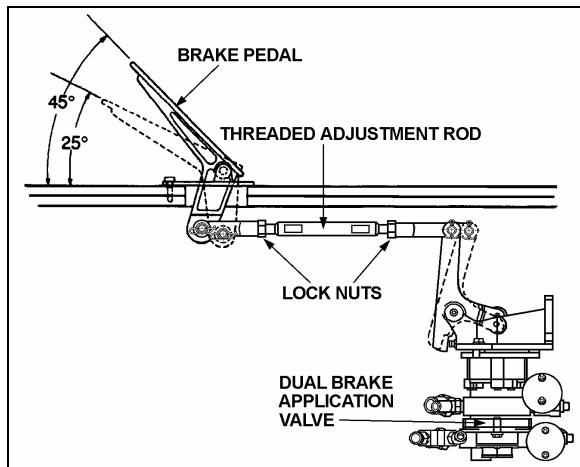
BRAKE PEDAL ADJUSTMENT 12208
